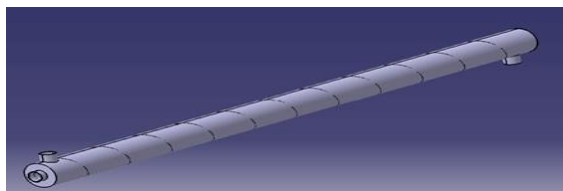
Assembly Model of Inner Tube, Helix and Outer Tube on Heat Exchanger
